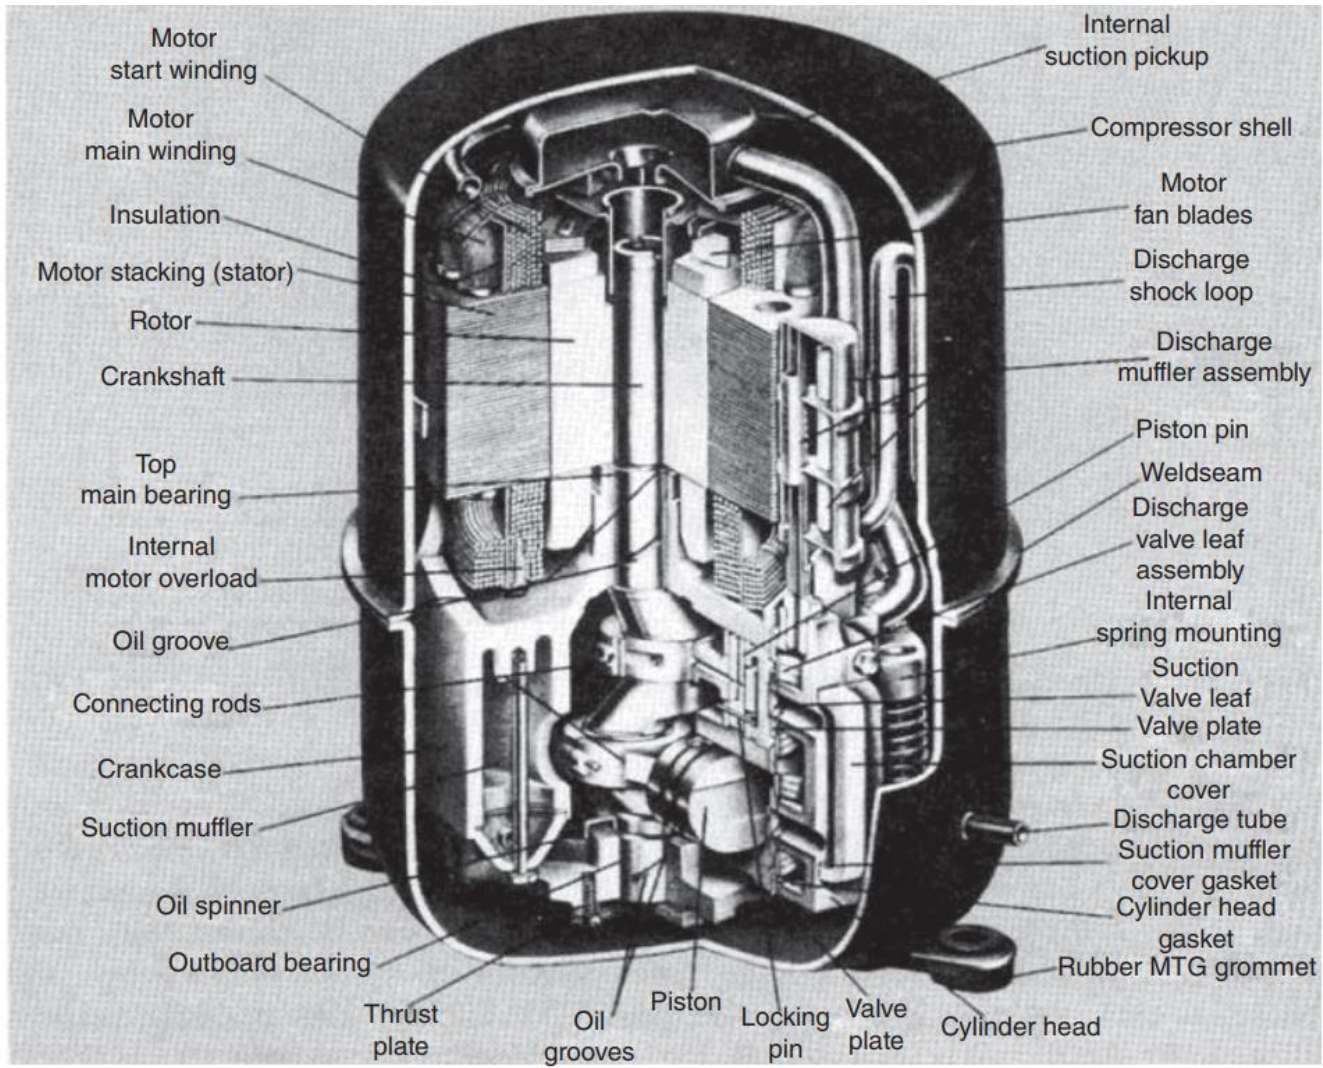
A typical hermetic reciprocating compressor. Courtesy of Tecumseh Products Co.
